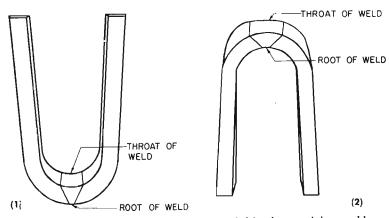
Examples of satisfactory guided-bend tests of butt welds.
